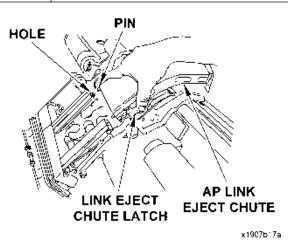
AP Link Eject Chute Latches, Pins, and Pin Holes Inspections.
